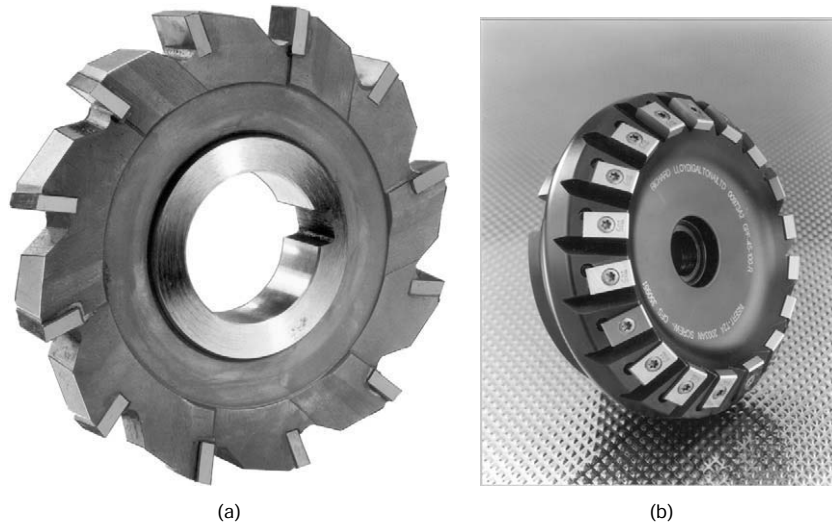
Carbide-tipped milling cutters: (a) brazed tip cutter; (b) inserted disposable tip cutter (reproduced courtesy of Richard Lloyd (Galtona) Ltd)
